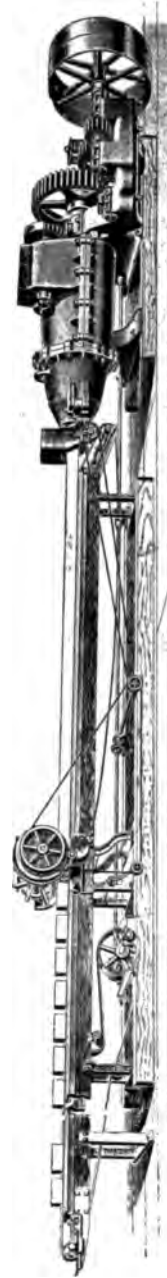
Screw Machine with Distributing Cylinders (Penfield).
